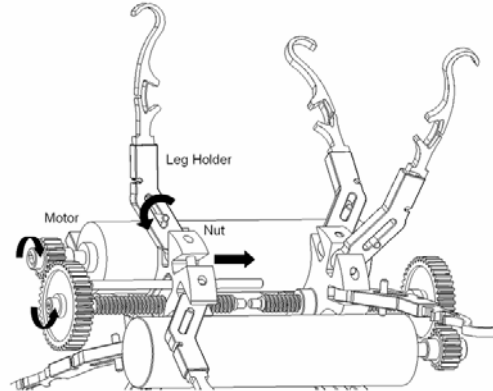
Side view of the capsule showing motor, gears, lead screw, leg-holder, leg and pins. The arrows show the direction of translation of the nut and the rotational movement imparted to the leg-holder.
